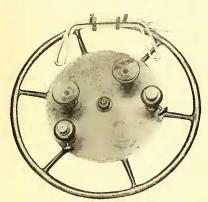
FORM FOR WINDING G. E.-800 ARMATURE COILS
